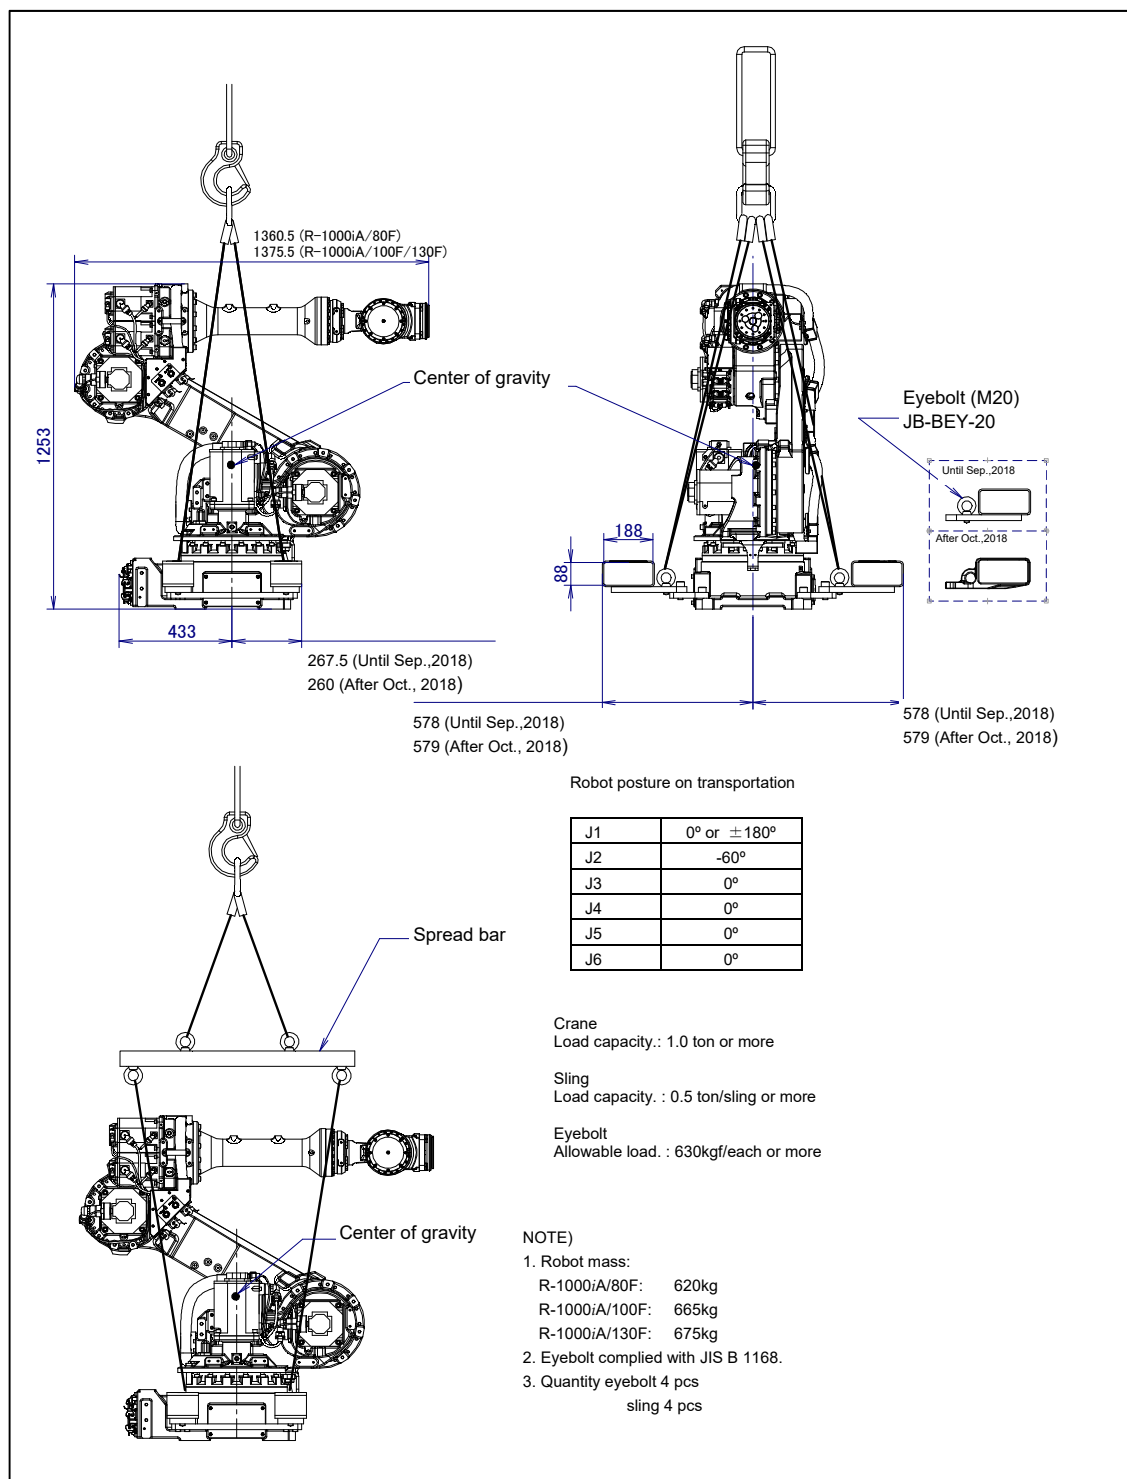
(b) Transportation using a crane (R-1000iA/80F/100F/130F)
